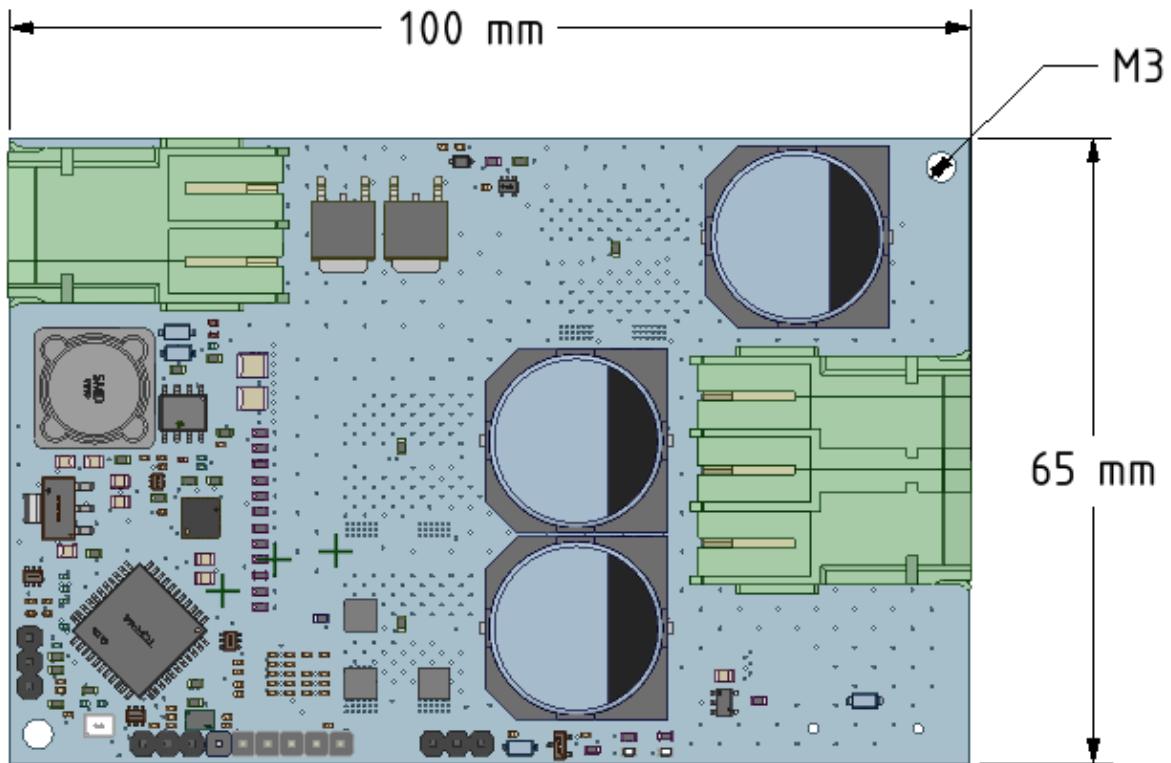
ZIKODRIVE 2 Top View (Without Casing)
